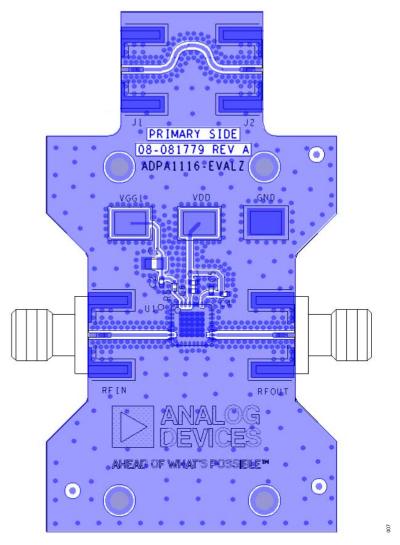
ADPA1116-EVALZ Assembly Drawing (Note That J1 and J2 Are Not Installed)
